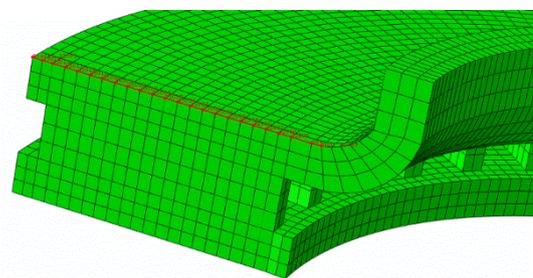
Cross-section of brake disc and the definition of path-1 (red dots)
